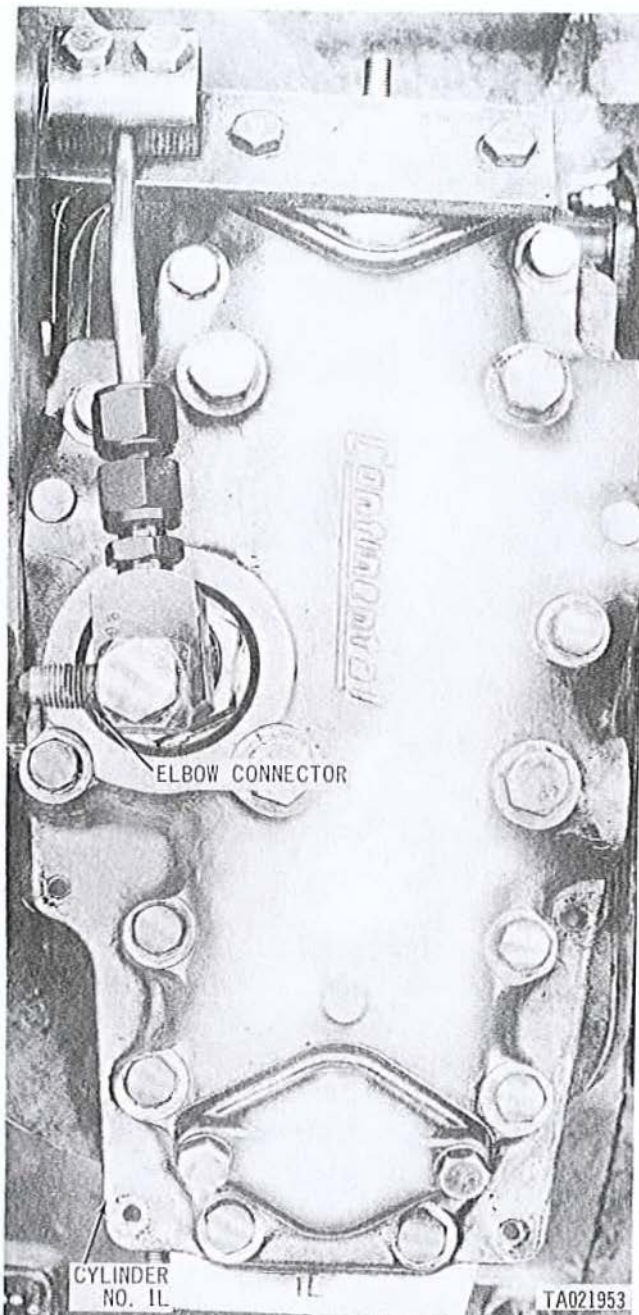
Removing or installing fuel injector nozzle, fuel tube elbow connector and special bolt, cylinder No. 1L.
